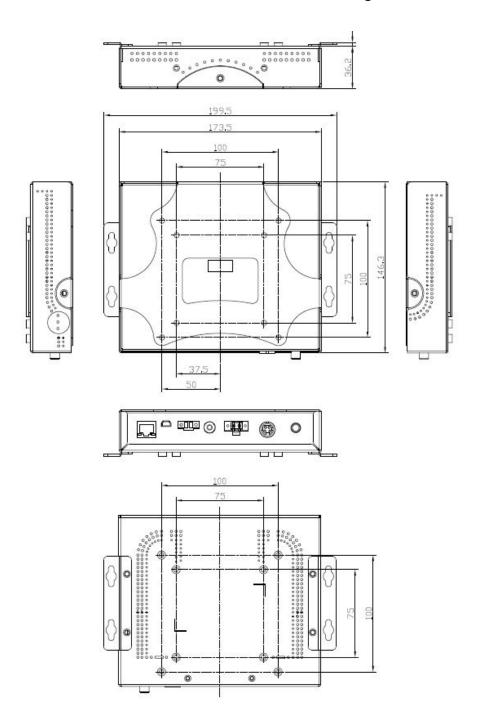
AUPS-B10/B20 Dimensions (mm)
